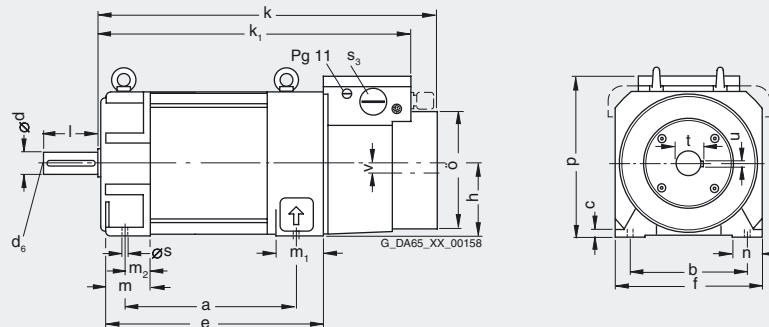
1PH7, type of construction IM B3, forced ventilation, with pipe connection, NDE
